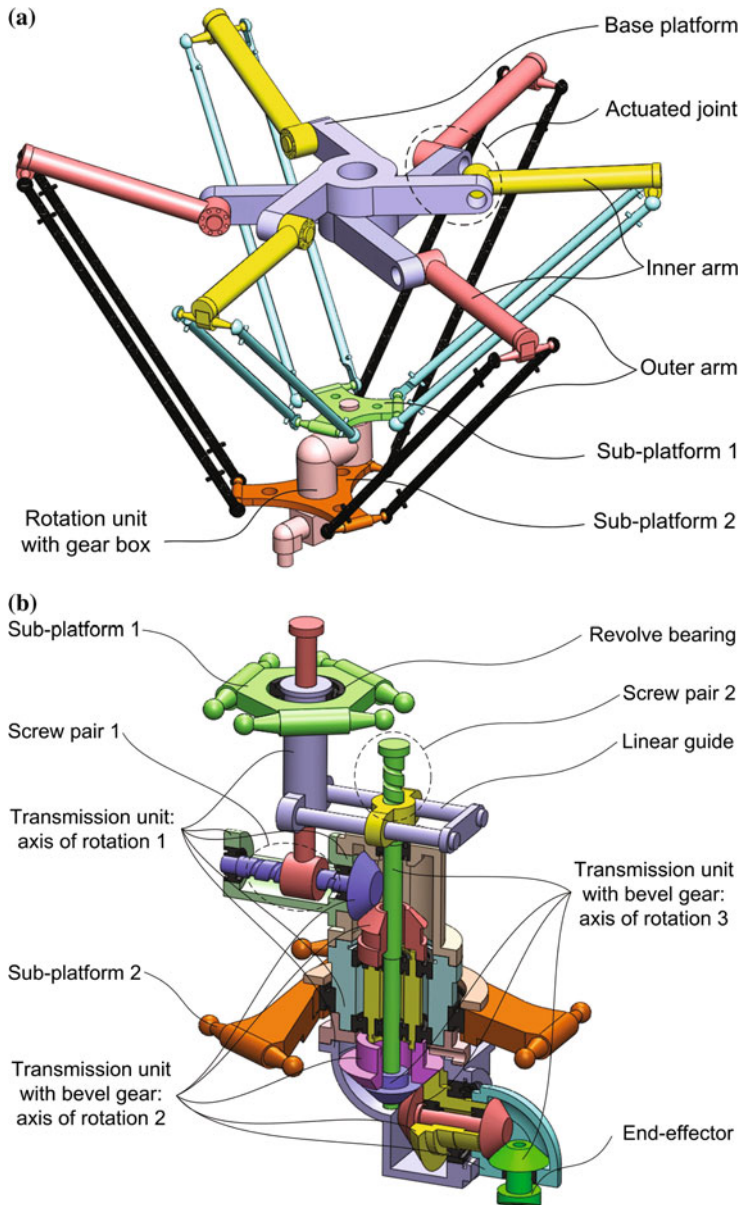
The CAD model of the double Delta robot. a Architecture. b Gearbox
